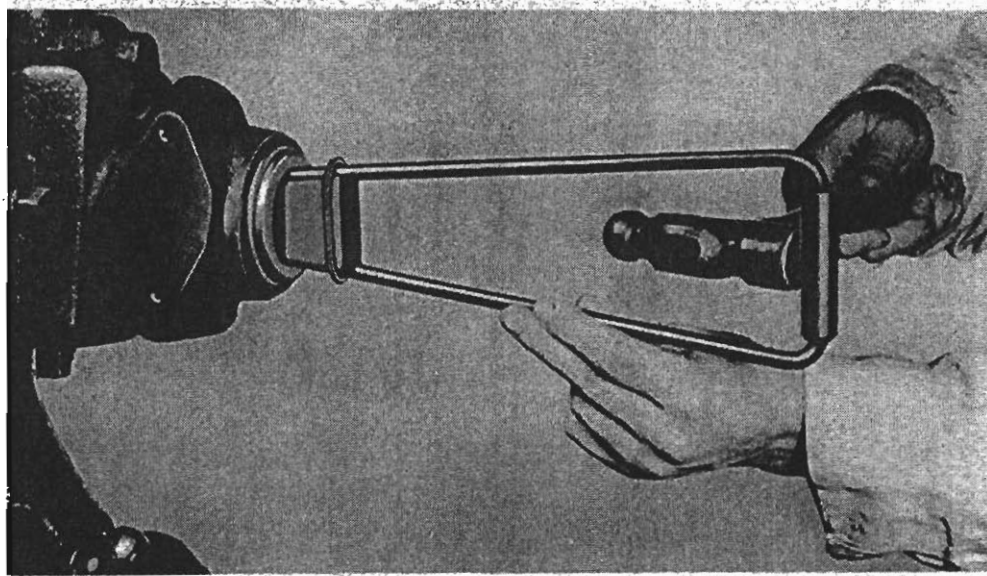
Driving Out the Main Shaft Front Bearing.
